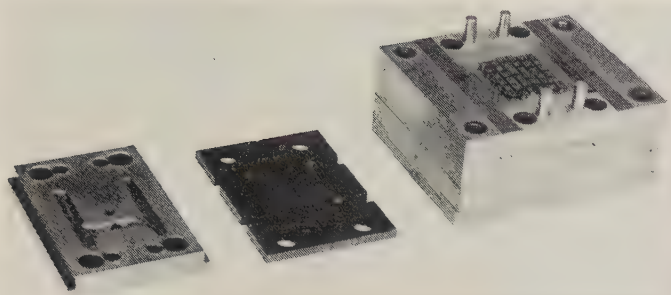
Loaded die with top plate and injection manifold ready to be closed.
